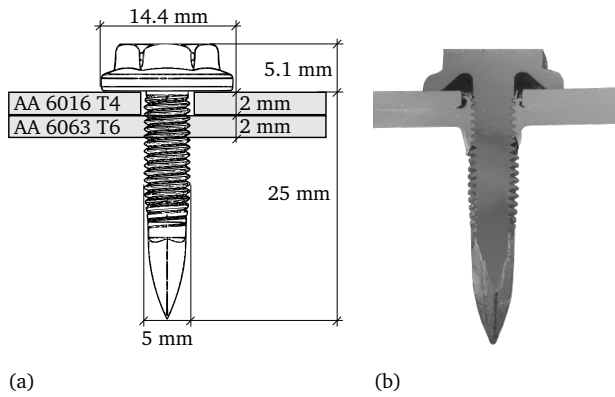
FDS connection. (a) Schematic drawing. (b) Picture of the cross-section.
